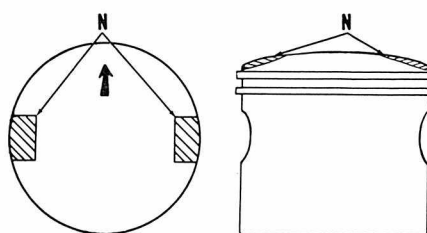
If manufacturer recommends cutting the piston (N) to advance transfer port timing, use extreme care. Depth of cut will weaken piston and possibly damage piston rings.
